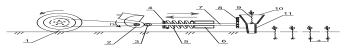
Kinematic scheme of the working section of the seedling planting machine 1 base wheel; 2 eccentric cams, 3 - rollers; 4- limiter;
